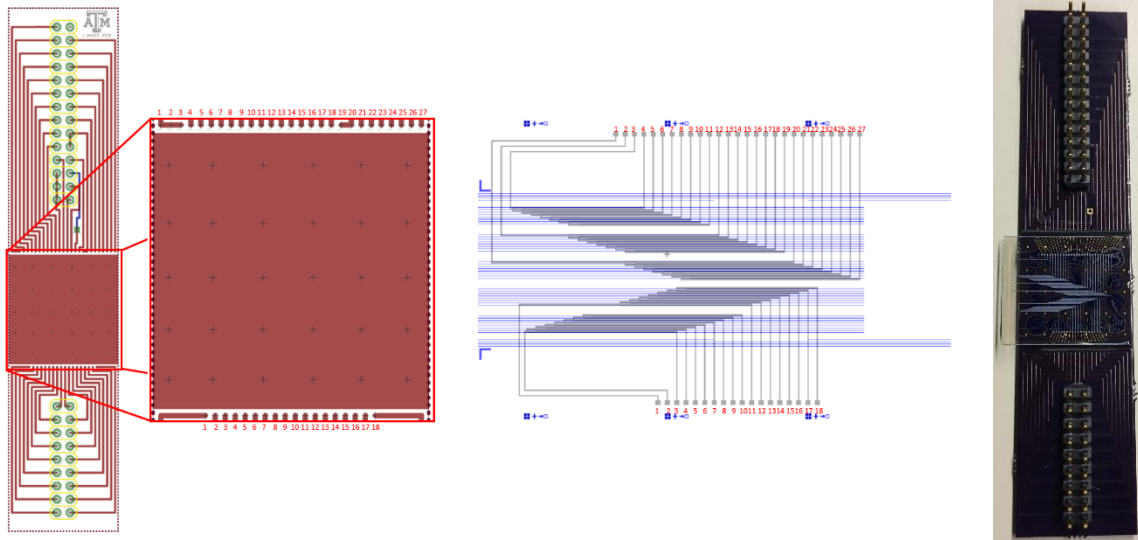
PCB schematic and GDSII layout of OPA. Right hand picture is actual wirebonded device.
